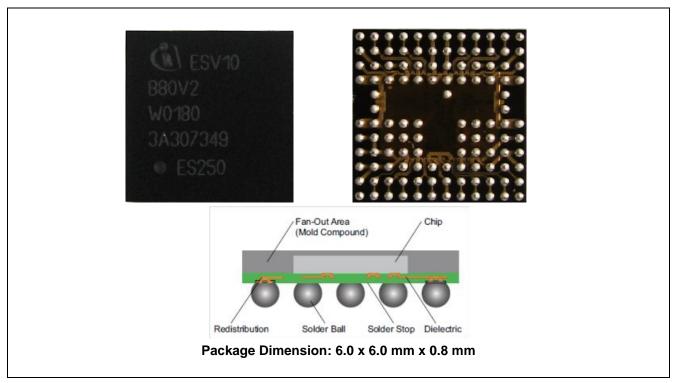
Top View (left), Bottom View (right) and Side View of BGT80 in eWLB Package
